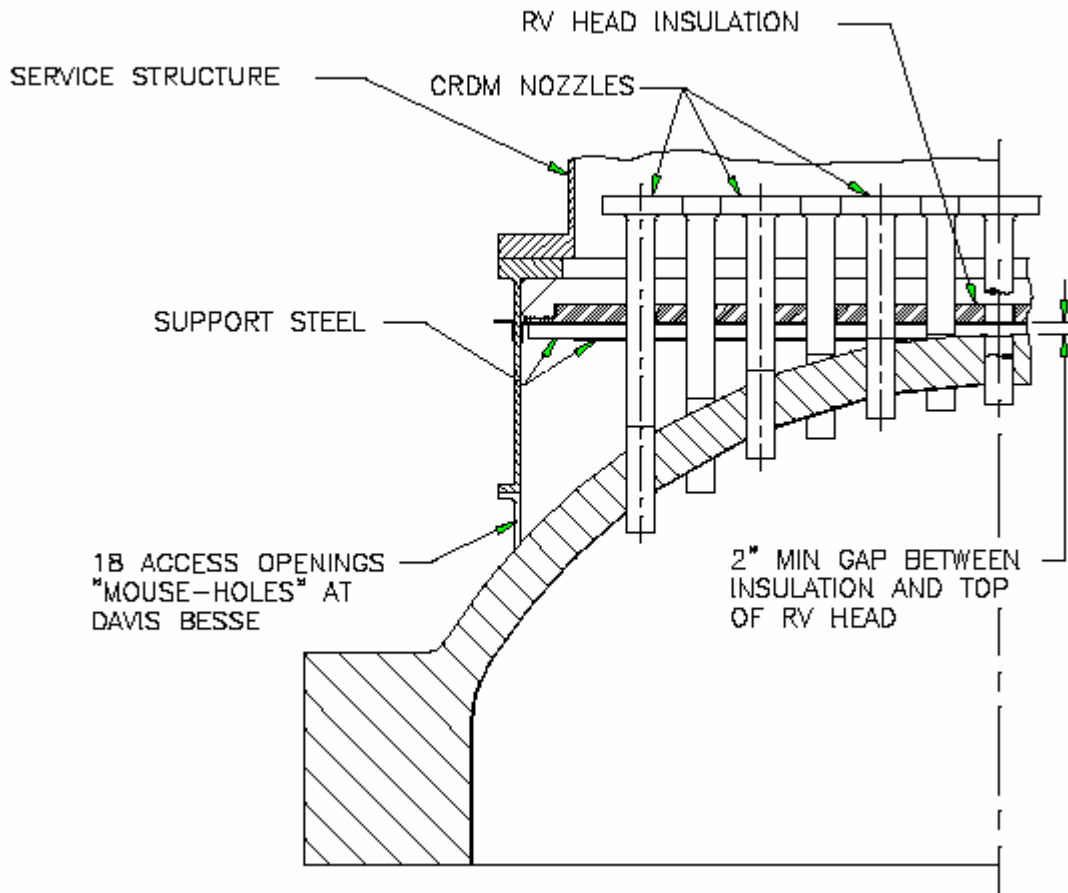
Davis-Besse Reactor Pressure Vessel Head Sectional View
